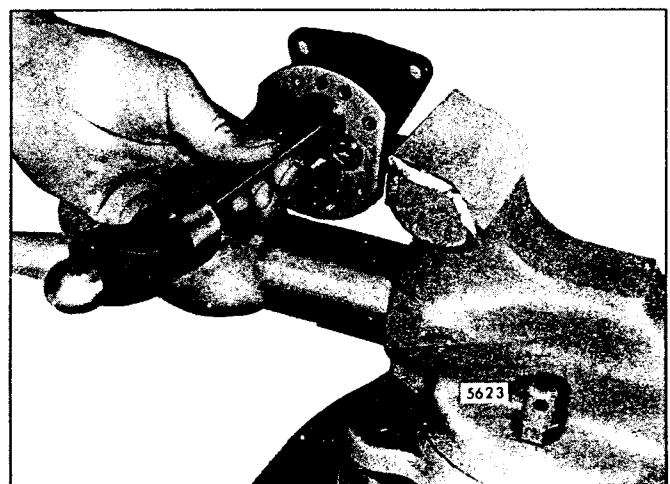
Removing Oil Seals Using Tool J 1508-13
